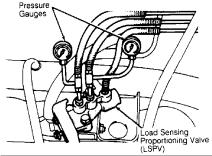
Connecting Pressure Gauges to LSPV (Pickup & Ram-50) Courtesy of Mitsubishi Motor Sales of America.
